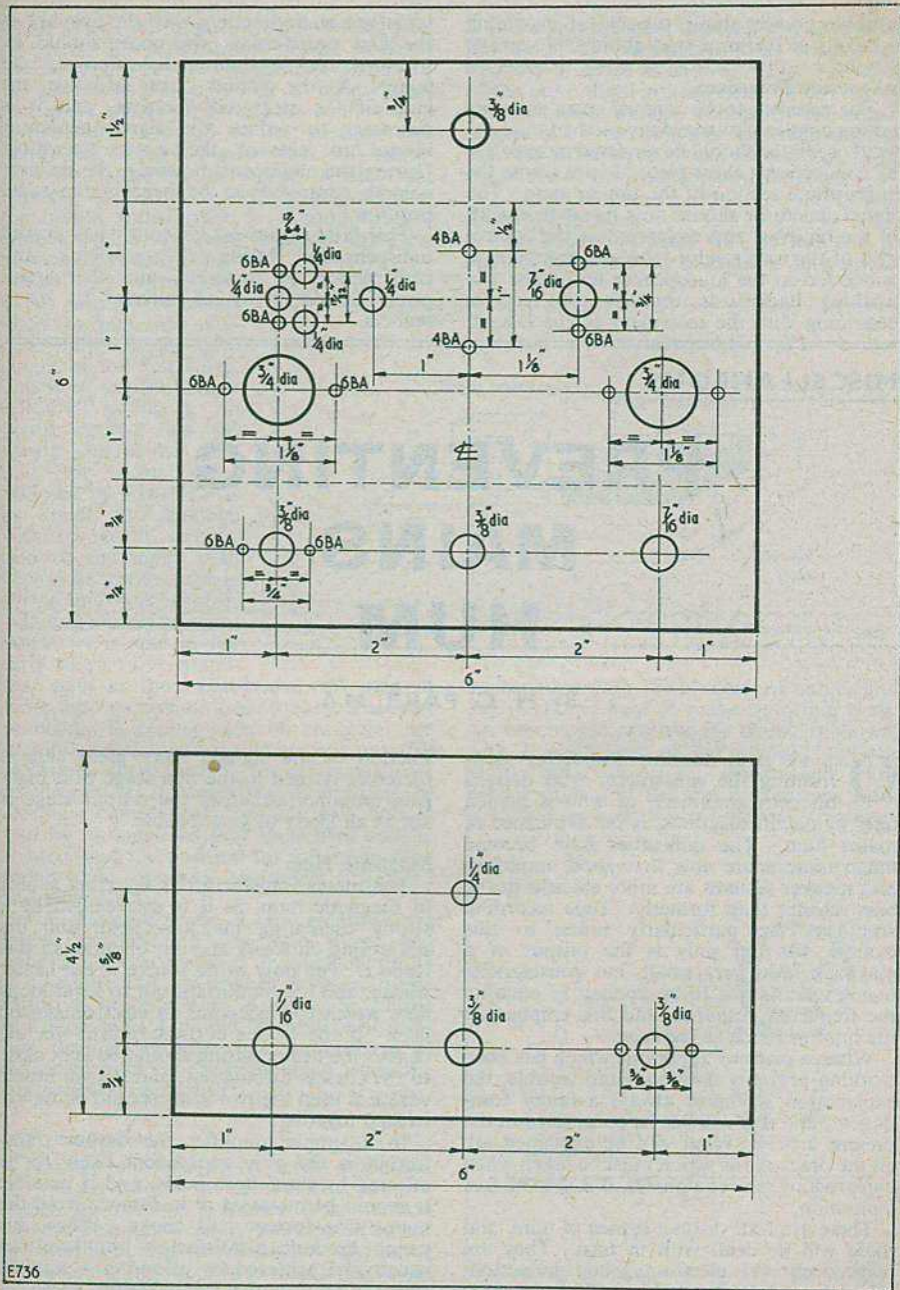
Drawing showing chassis drilling dimensions. The chassis sides should be bent upwards on the dotted lines shown
